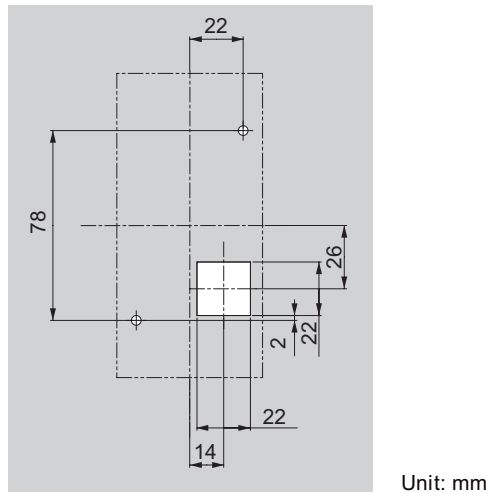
Panel Cut-Out Dimensions (External/Face-Mount Installation)
